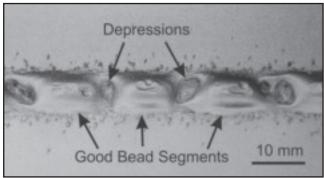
A close-up top view of a bead-on-plate GMA weld showing the aperiodic discontinuous weld bead defect.
